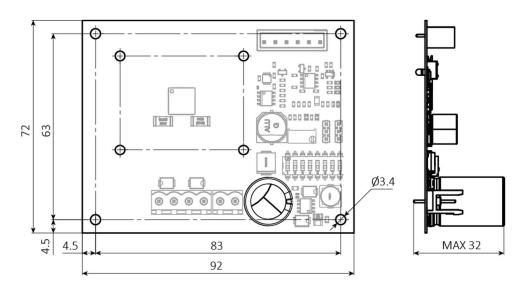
Dimensions of stepper motor driver SMD-1.6 open frame version
